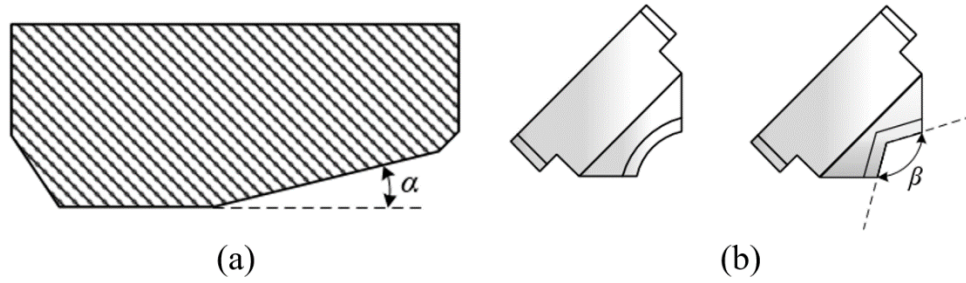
a) Longitudinal cut of the die with the inlet angle definition, b) front view of the die with the transverse angle definition
